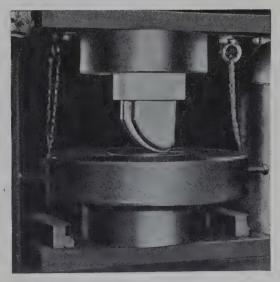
Forming a mold by hobbing. (Courtesy of General Electric Company.)
